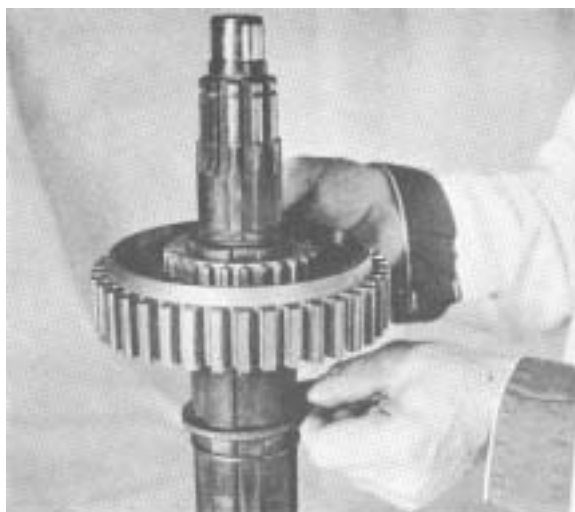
Install 2nd speed gear retainer ring, locating washer, and 2nd speed gear on mainshaft. (NOTE: clutching teeth are up.)
